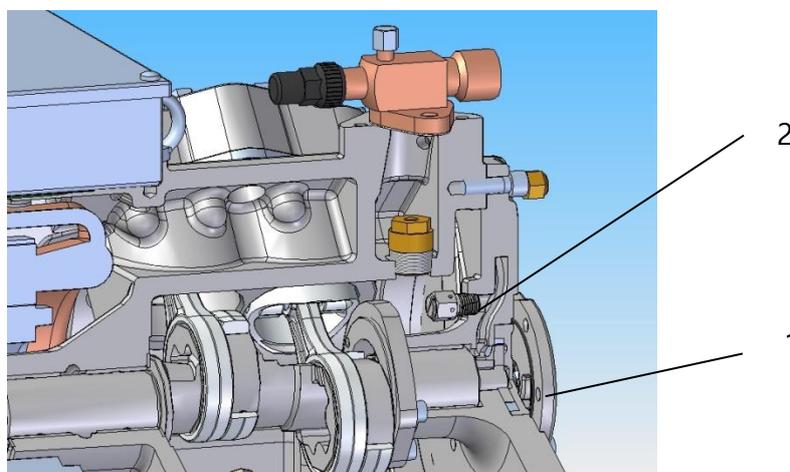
Compressor model PP4-L/Hxx: gear pump and safety valve
